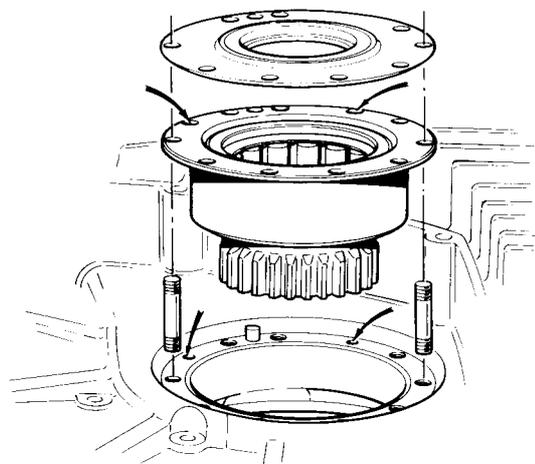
Aligning the stationary gear during assembly into the housing, illustrating the use of guide studs, and the importance of keeping clean the oil supply holes (arrowed).
